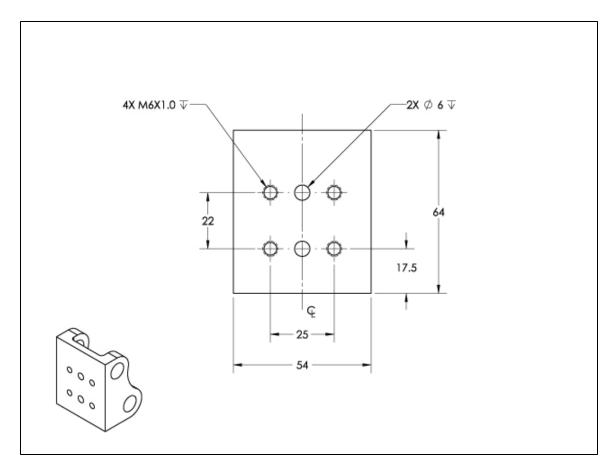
Technical dimensions of the Gripper Distal Phalanx.
